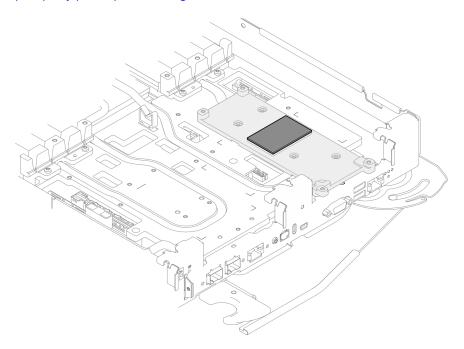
OPA 400 riser assembly interface plate single-use gap pad
